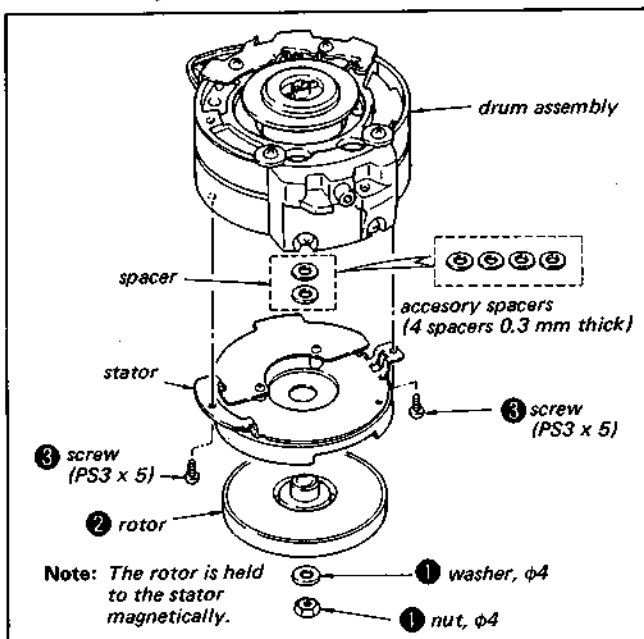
Removal of the stator and rotor when replacing the drum
